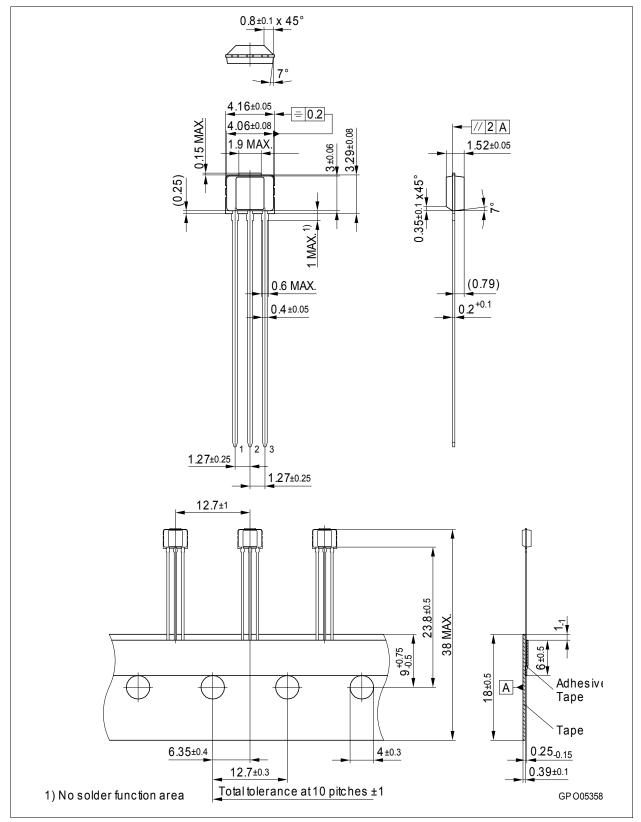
PG-SSO-3-2 Package Outline (All dimensions in mm)
